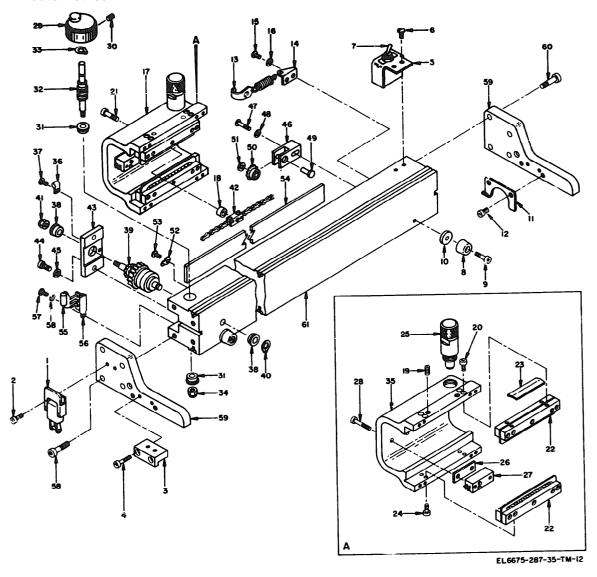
Removal and separation of carriage assembly, exploded view.
